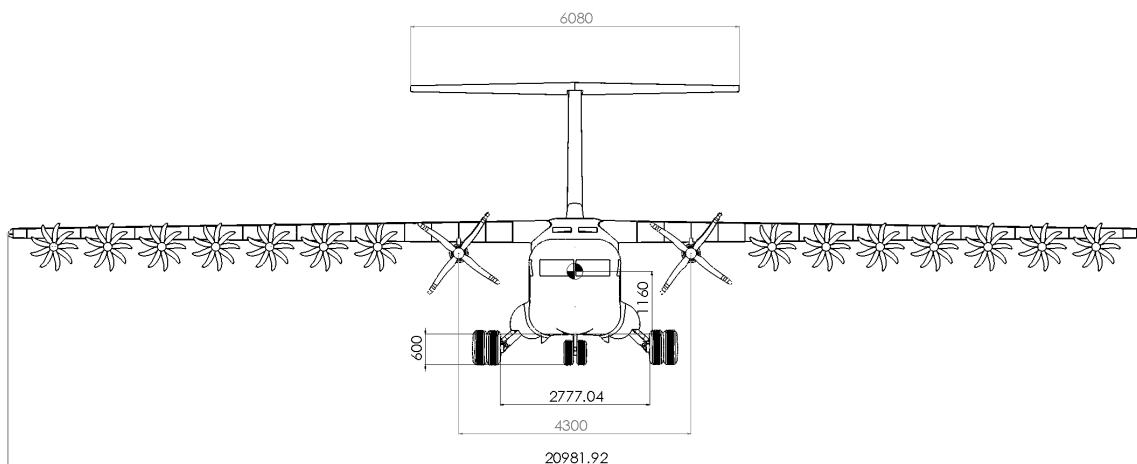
Front view of the E-COMmuter (dimensions given in mm).
